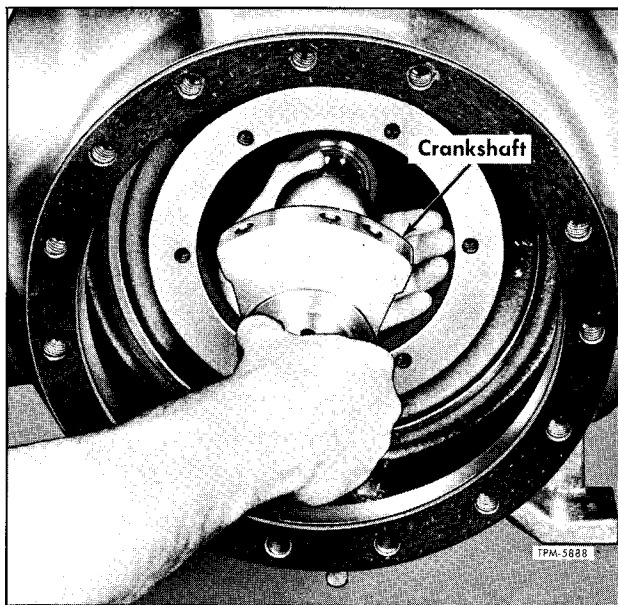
Recommended Method of Supporting Compressor Crankshaft When Making Replacement
